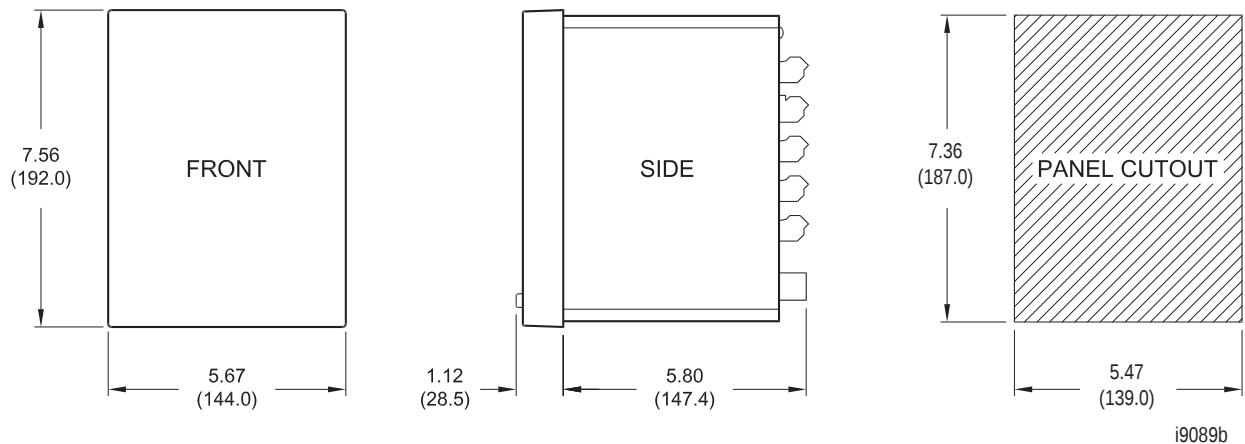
SEL-710 Dimensions for Rack- and Panel-Mount Models
